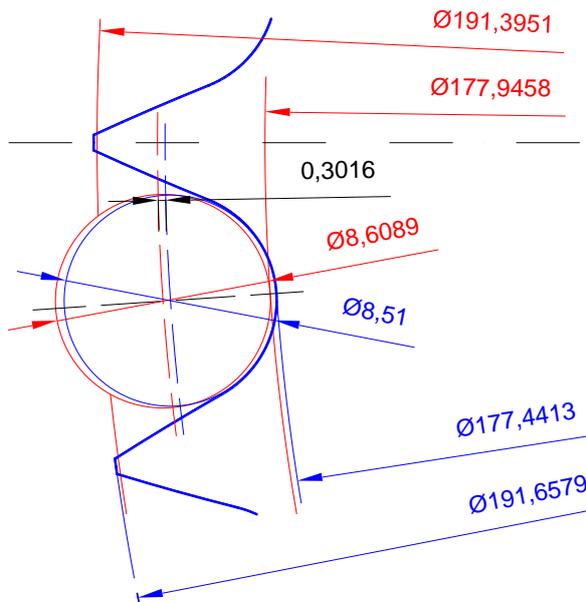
The drawing of sprocket profile computed and measured in frontal image show the profil difference of dimensions of computed sprocket in opposite with manufactured-measured sprocket . The difference is as shown the 0.3 [mm] (with blue is drawn up computed sprocket and with red is drawn the manufactured-measured sprocket) [2],[3],[8],[10],[15]
